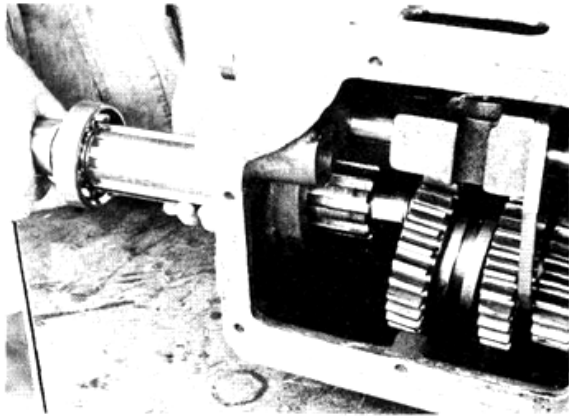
Withdrawing Lower Mainshaft (gearbox removed)
